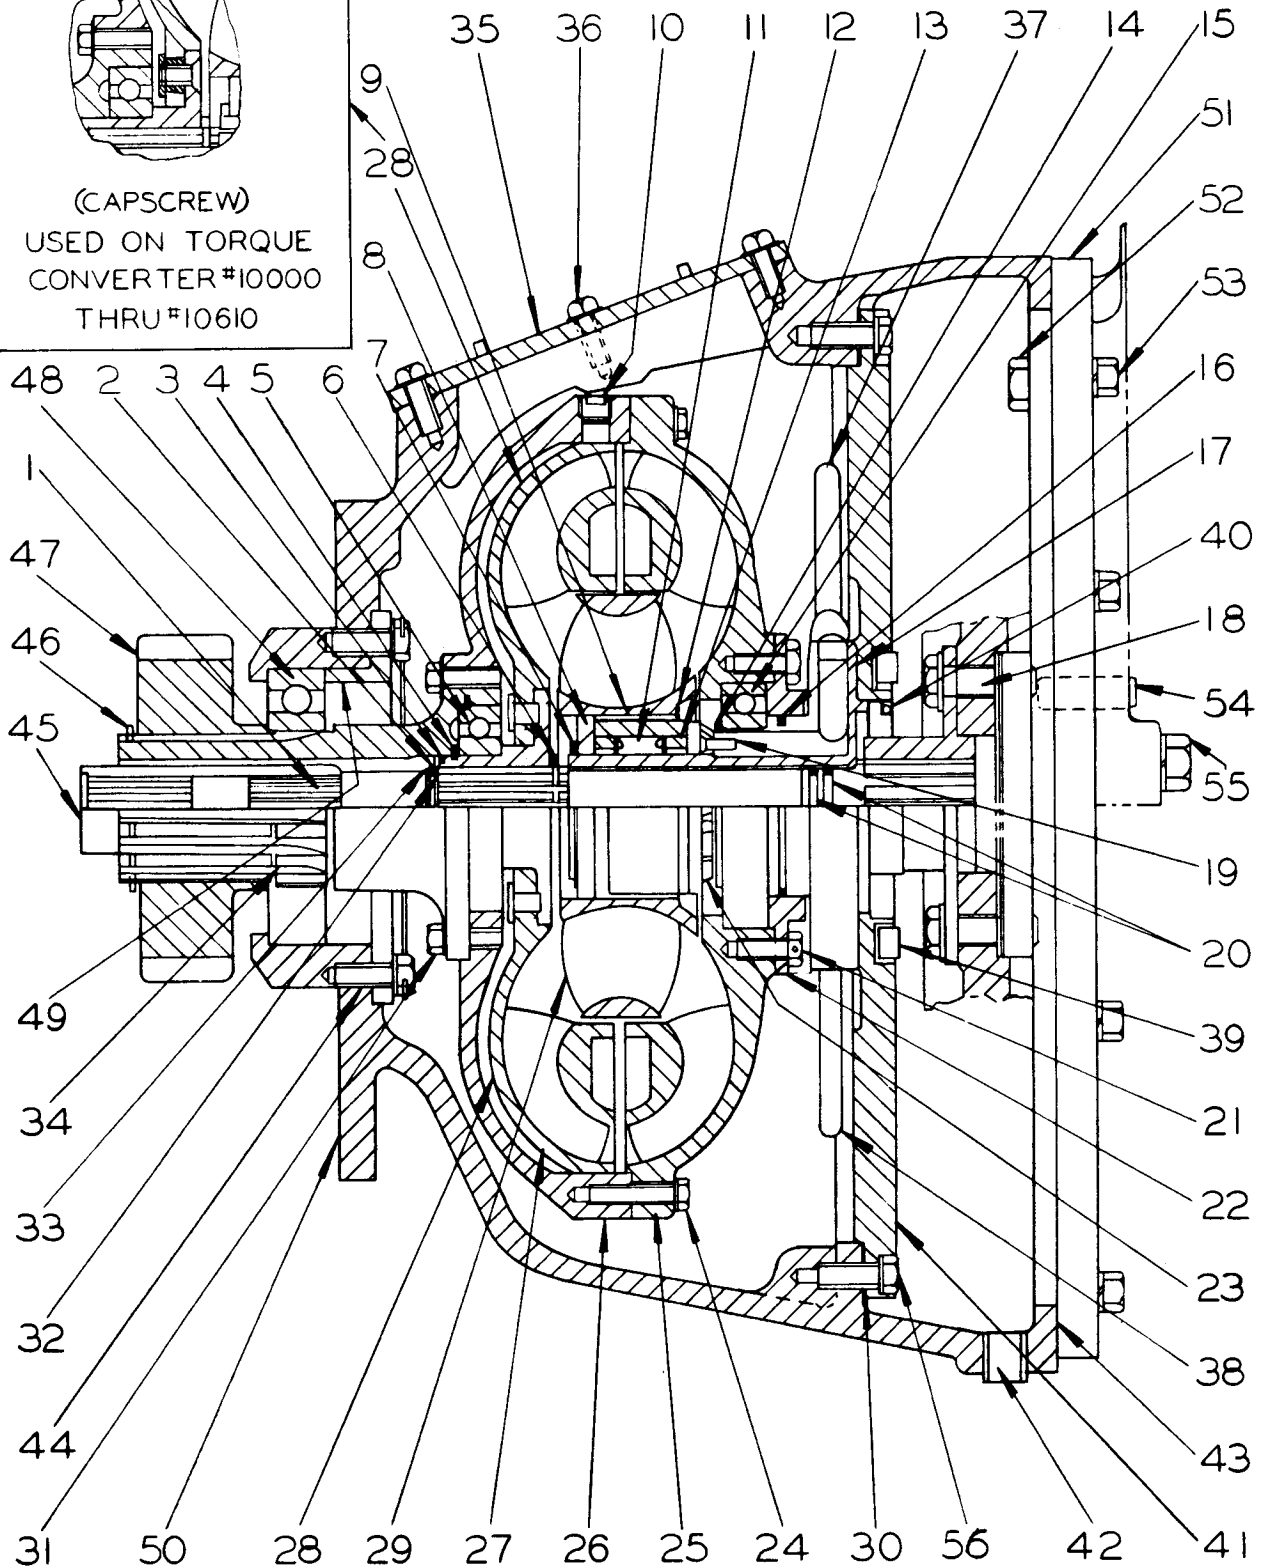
TORQUE CONVERTER AND FLYWHEEL HOUSING
